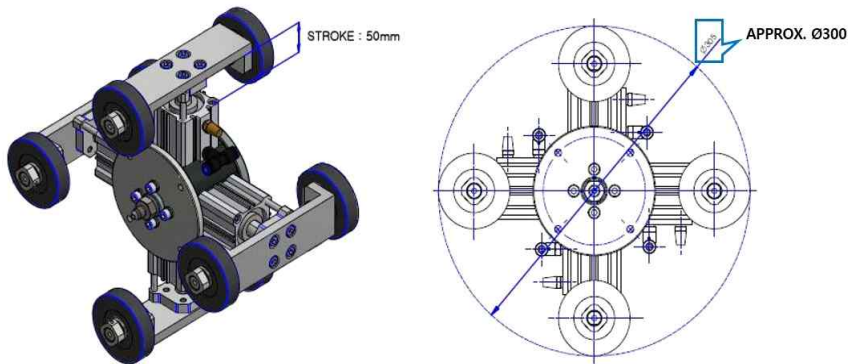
Stroke of air cylinder for the screw driving unit
